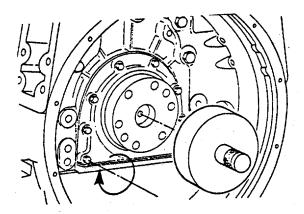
Checking Rear Cover and Oil Pan Flange.
